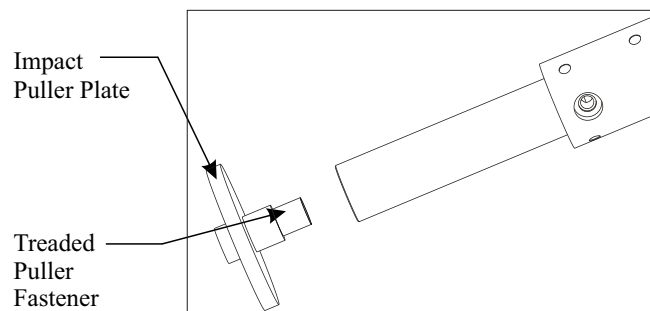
Impact puller to be tighten upon Shaft for hitting out of Air shaft.
